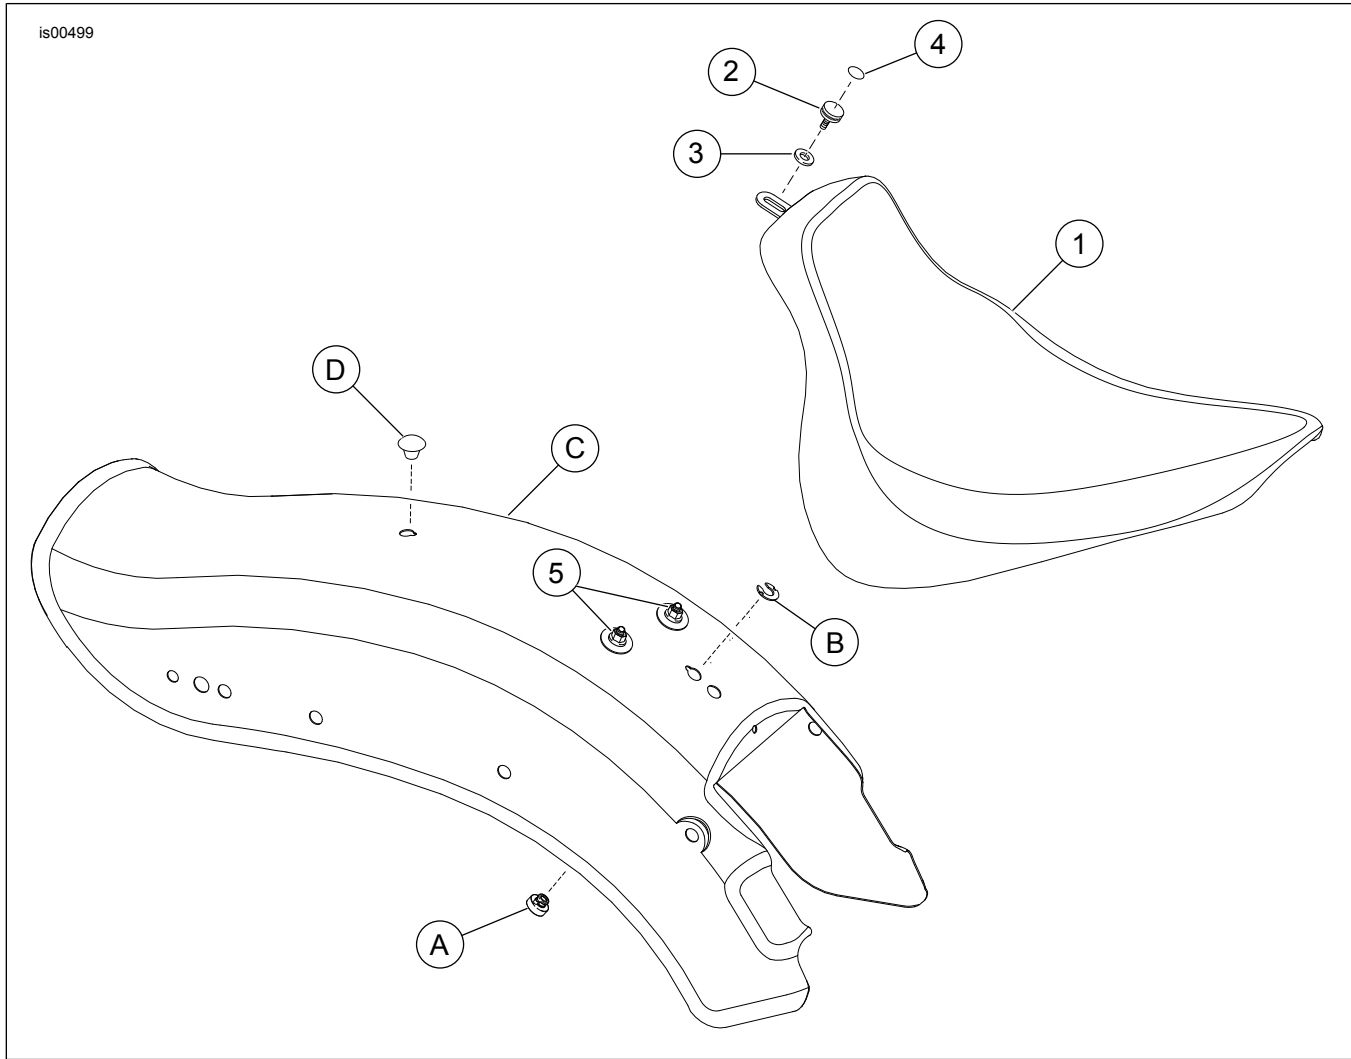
Service Parts: Softail Custom Solo Seat Kit
